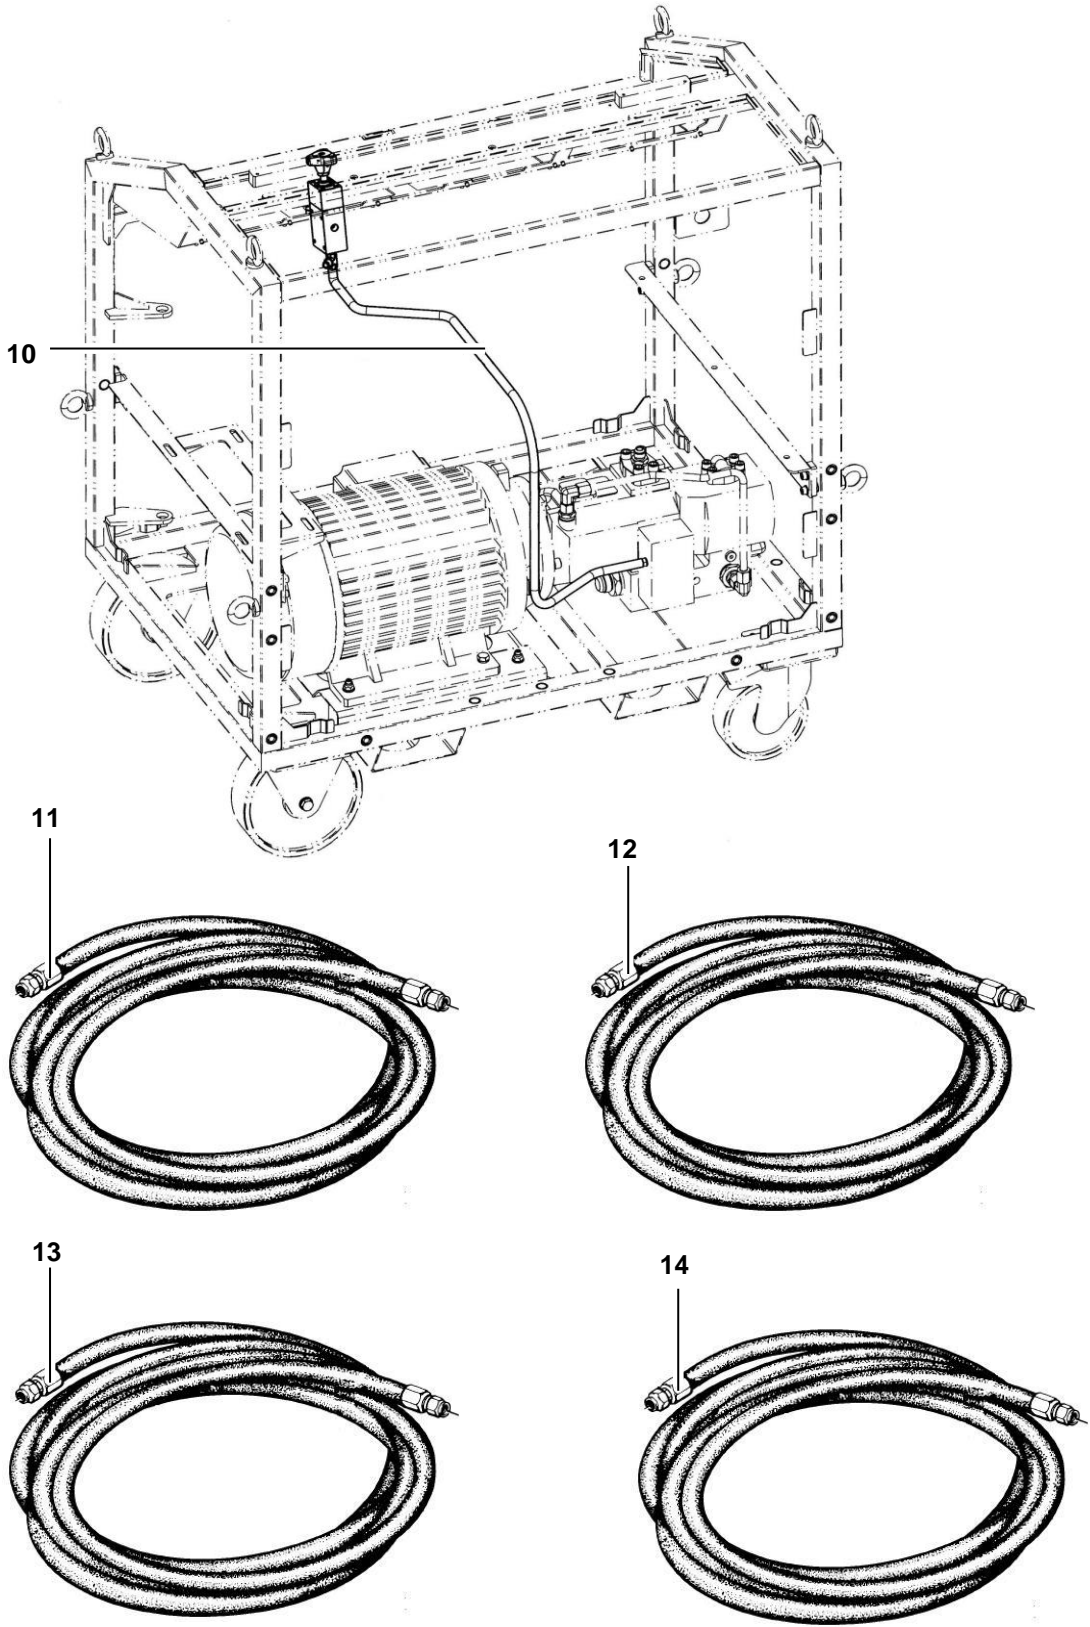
HOSES ASSY (Table 3 of 3)
